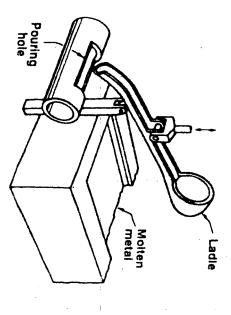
Simple mechanical ladle for cold-chamber machine.
